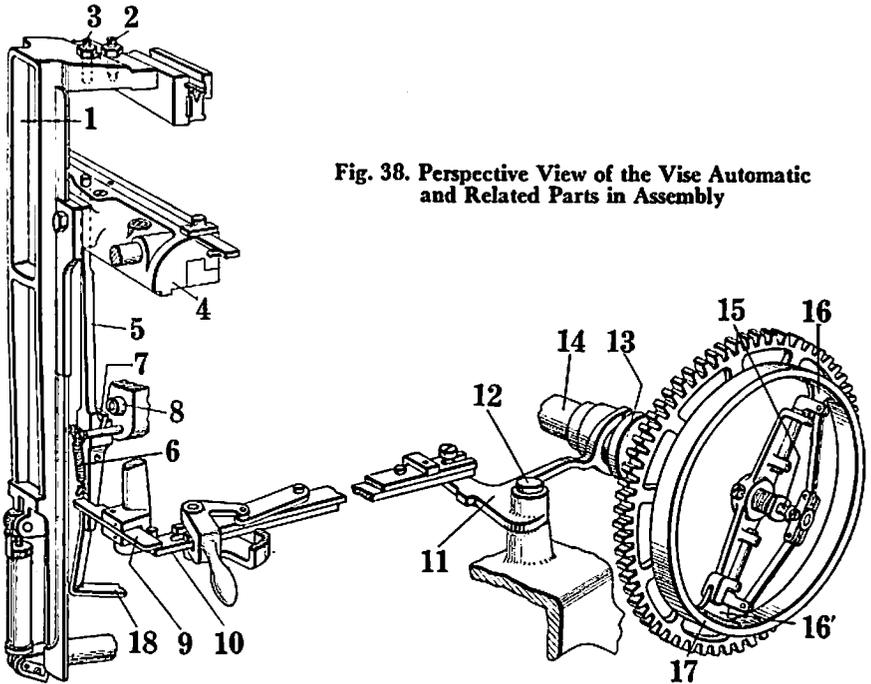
Perspective View of the Vise Automatic and Related Parts in Assembly
